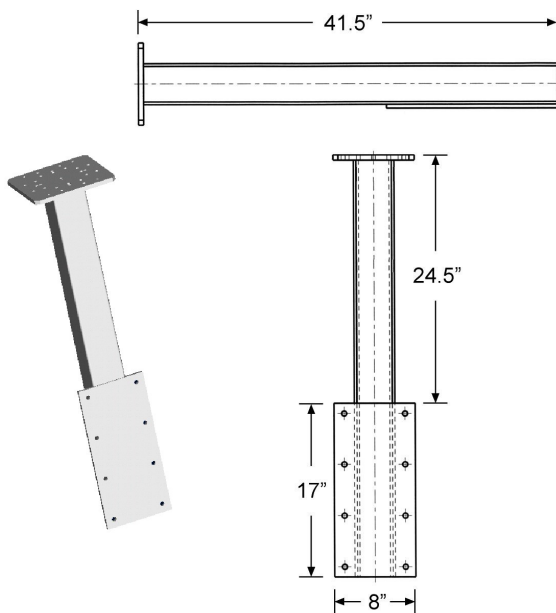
Wall Pedestal Mount - Used when the link needs to be elevated above the top of a wall.
